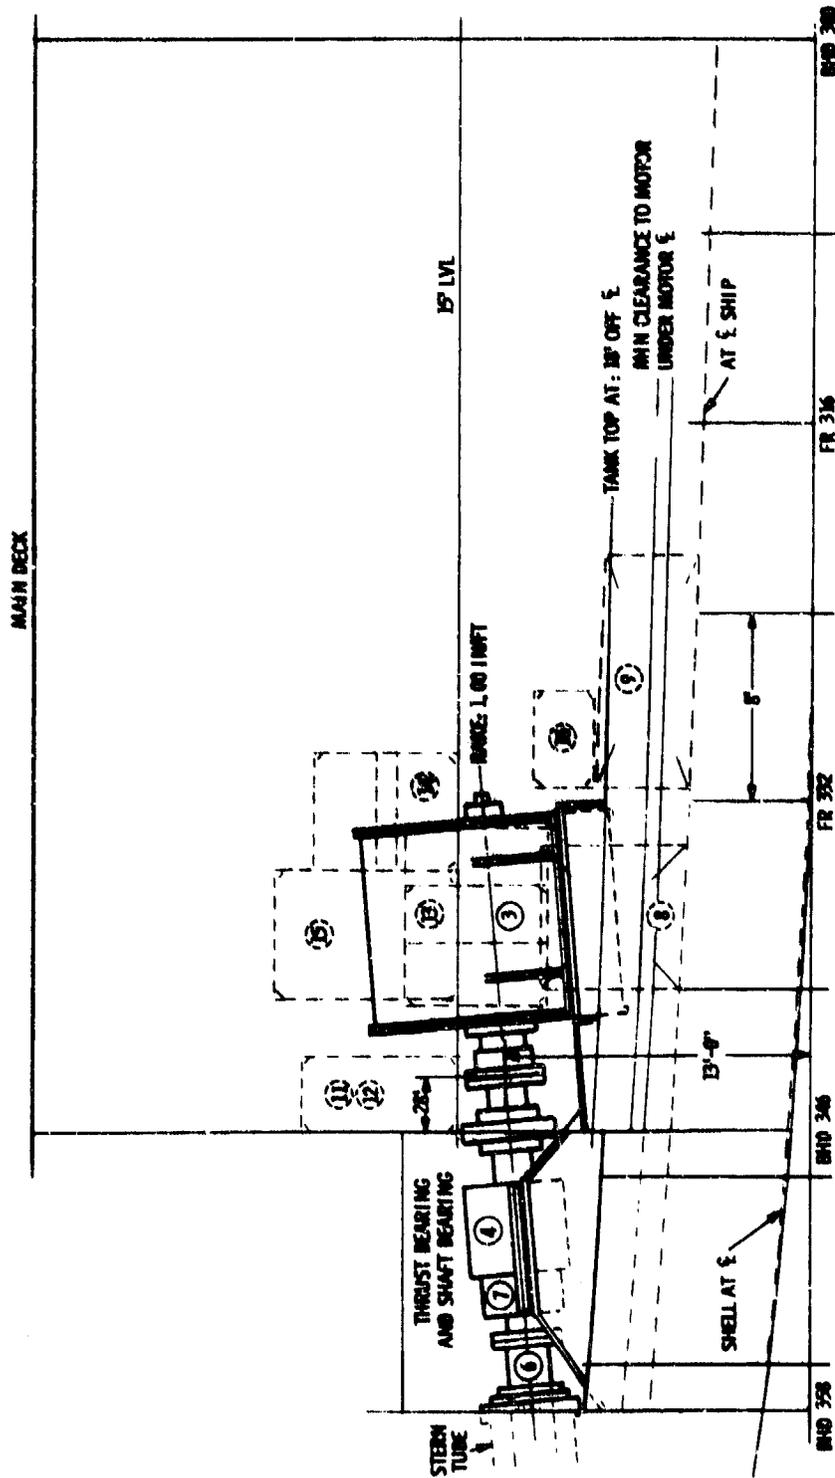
Machinery Arrangement in Destroyer, Aft Engine Room, Elevation
